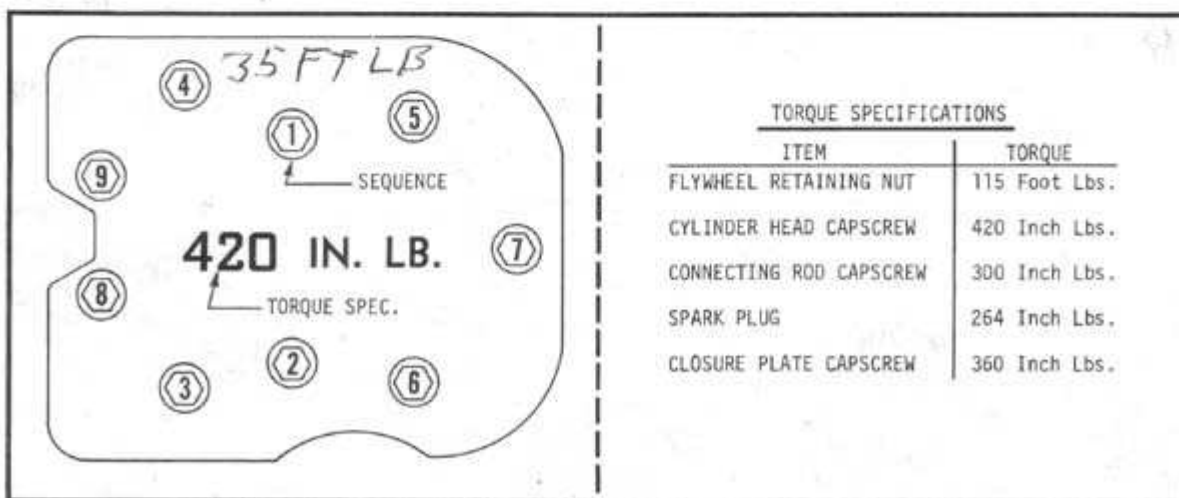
CYLINDER HEAD TIGHTENING SEQUENCE & TORQUE SPECIFICATION
